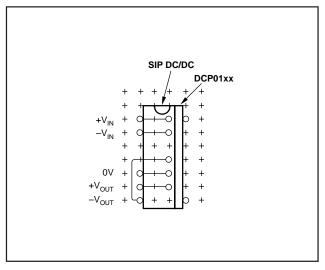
PCB Layout for DCP0115 and Competitive SIP DC/DC.
